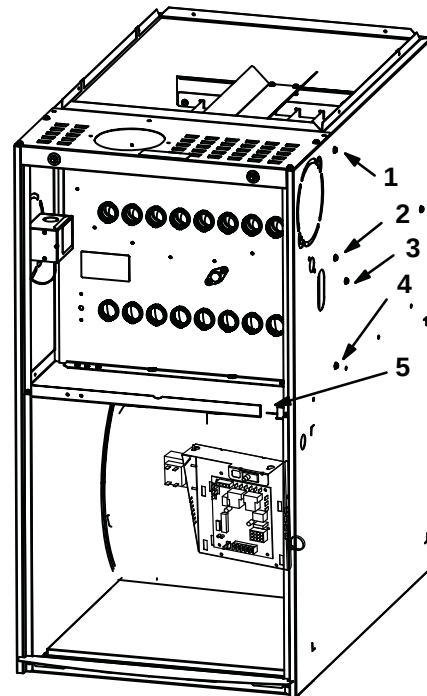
Remove 5 screws if necessary (either side of cabinet)
